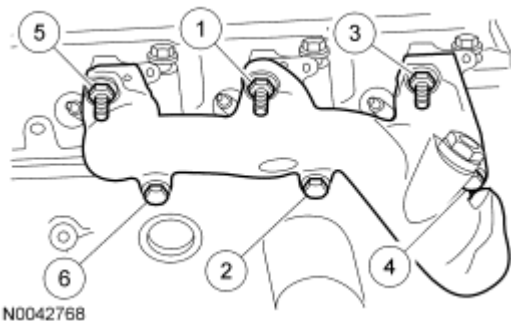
Identifying Tightening Sequence Of Exhaust Manifold Bolts
